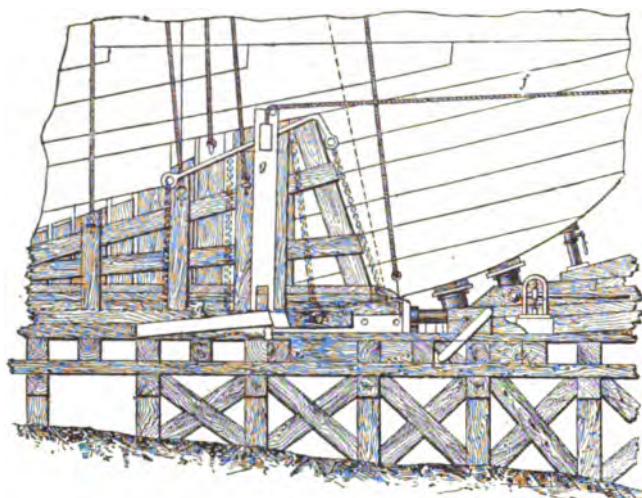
ENLARGED VIEW OF BOW OF THE "KAISER," SHOWING IMPORTANT DETAILS OF LAUNCH.
